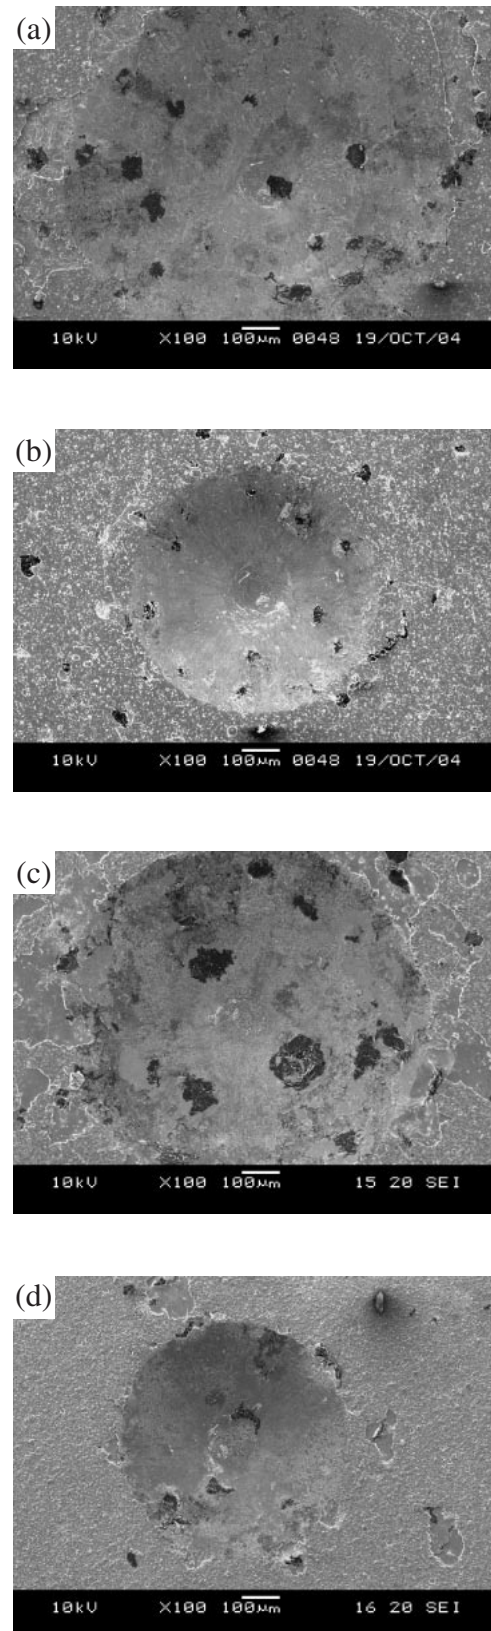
Fracture morphology of coated specimens by Rockwell C tester (a) DI-TiN, (b) ADI-TiN, (c) DI-TiAlN, (d) ADI-TiAlN.
